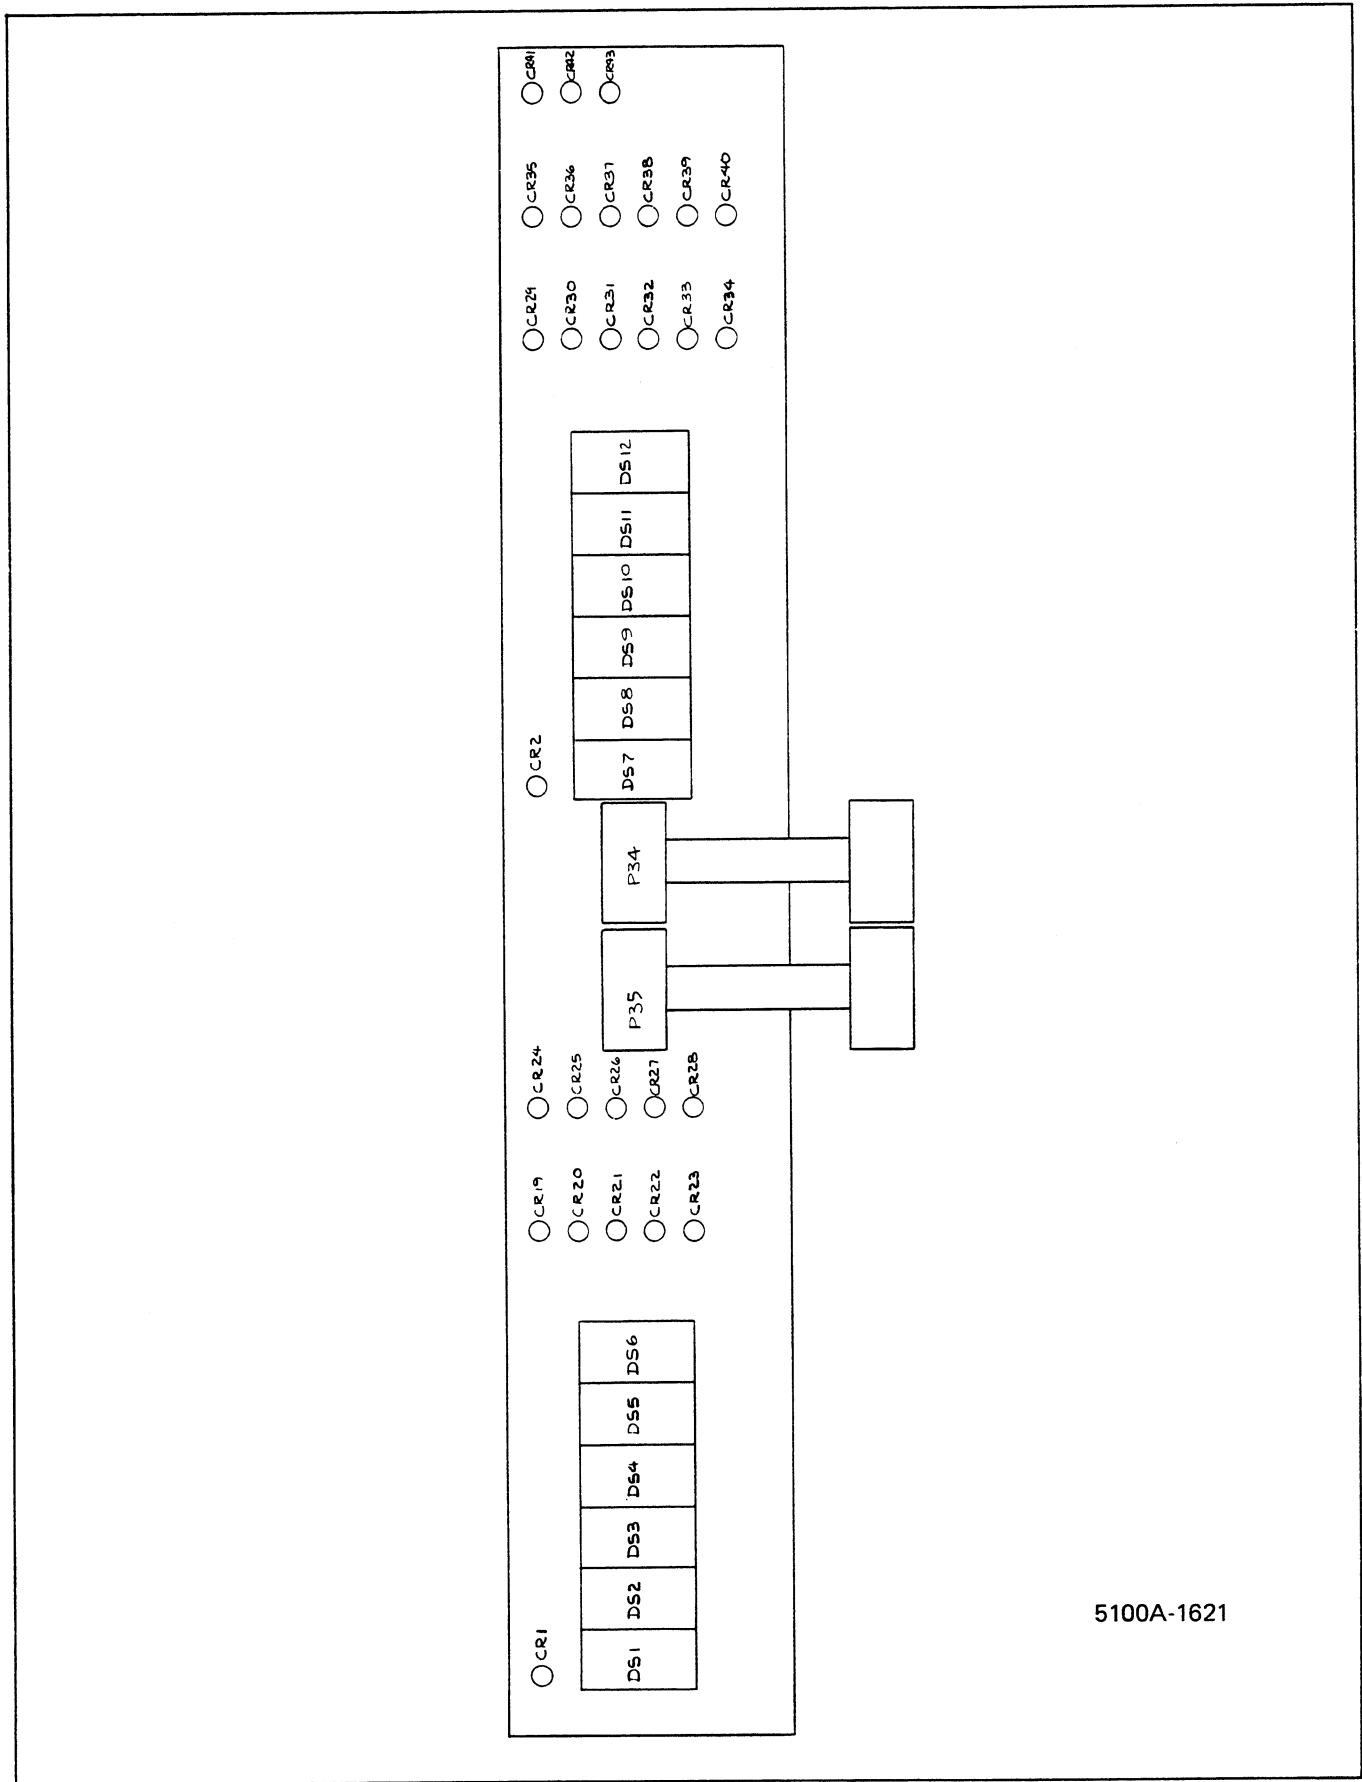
A10 Front Panel PCB Assembly, Storage (cont)
